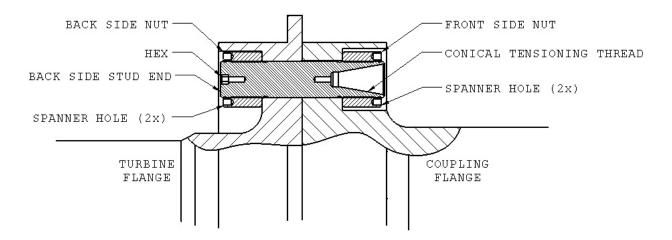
Cutaway View of Turbine Flange and Coupling Flange Bolted Joint
